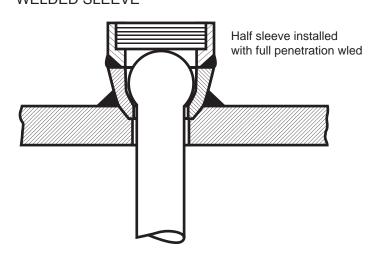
e HALF SLEEVE REPAIR PROCEDURE FOR DAMAGED BALL SOCKET FLEXIBLE STAYBOLT WELDED SLEEVE
